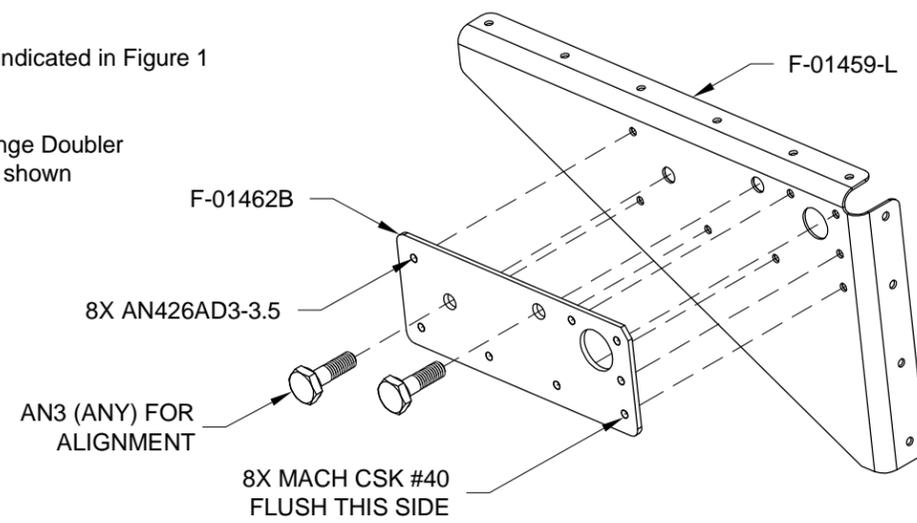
LEFT HINGE RIB ASSEMBLY
